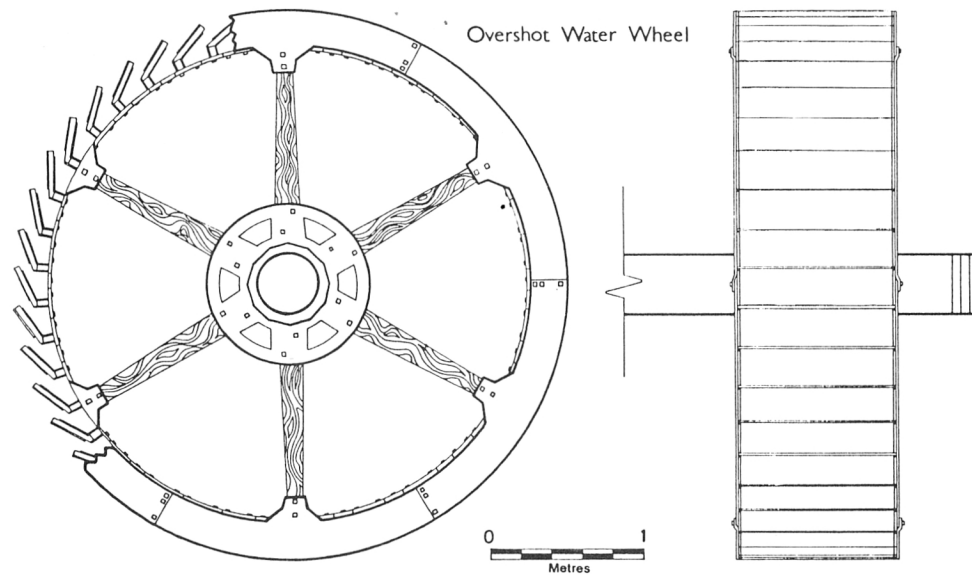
Cenarth Mill. Elevation of overshoot wheel.
